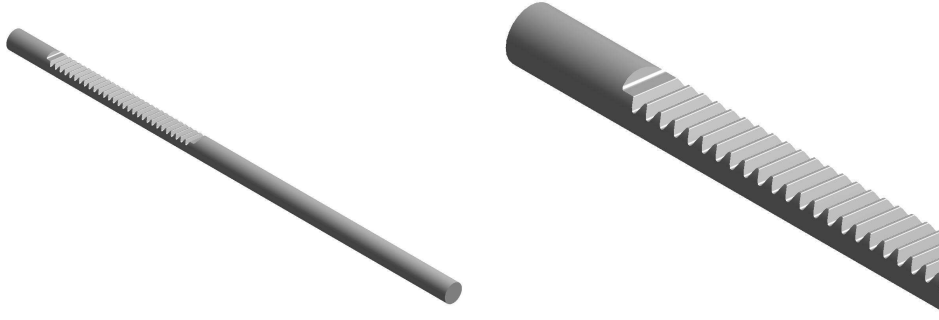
Car steering rack. Left, the workpiece. Right, tooth component.
